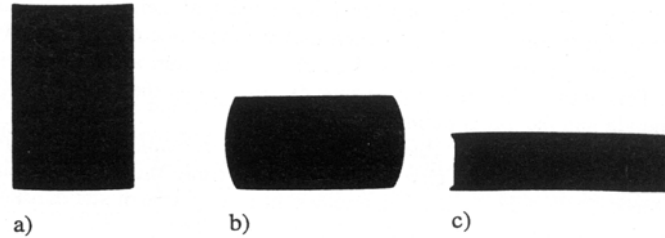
Schematic drawing of Rastegaev test specimen.
